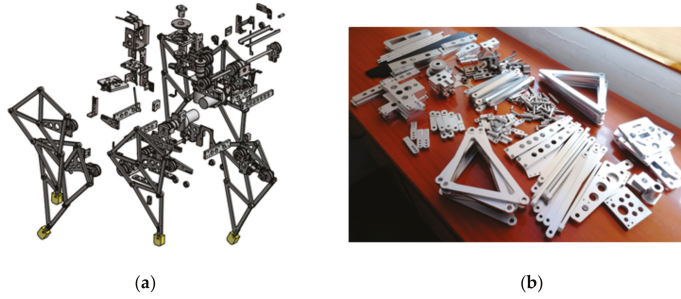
(a) Assembly drawing. (b) Mechanical components.
